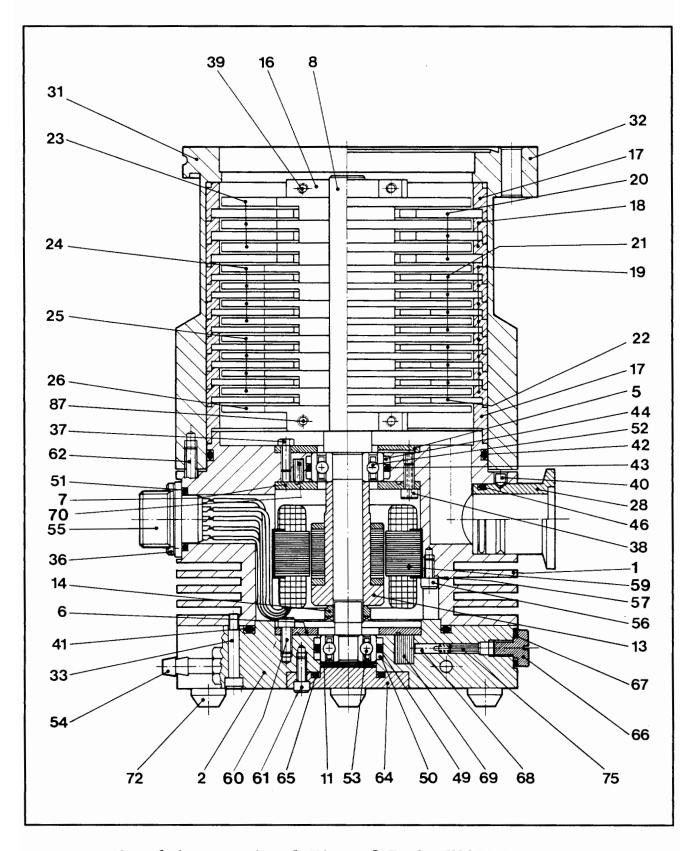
Sectional View of Turbo-V200A Pump
